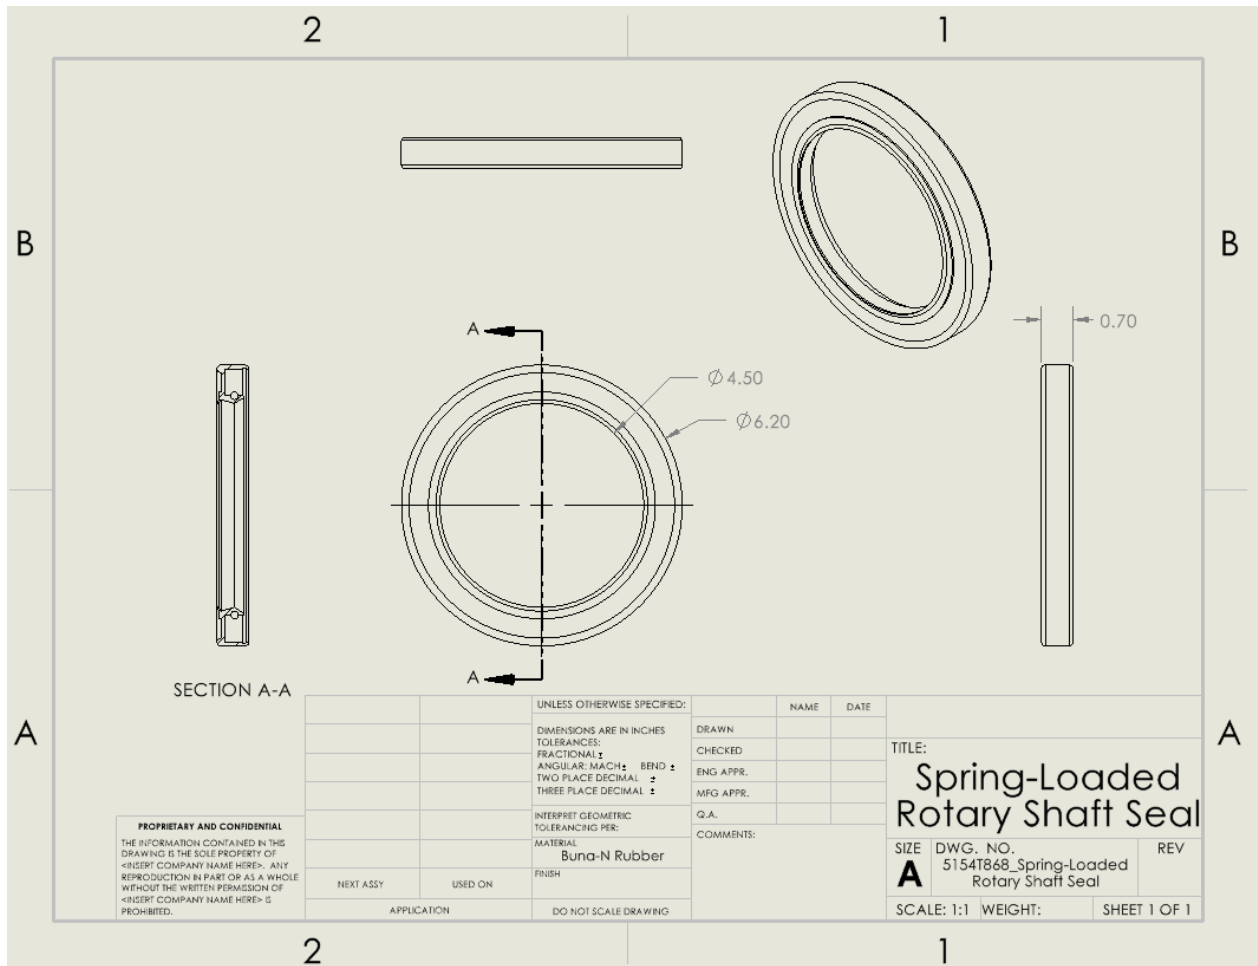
Output shaft spring-loaded rotary shaft seal drawing
